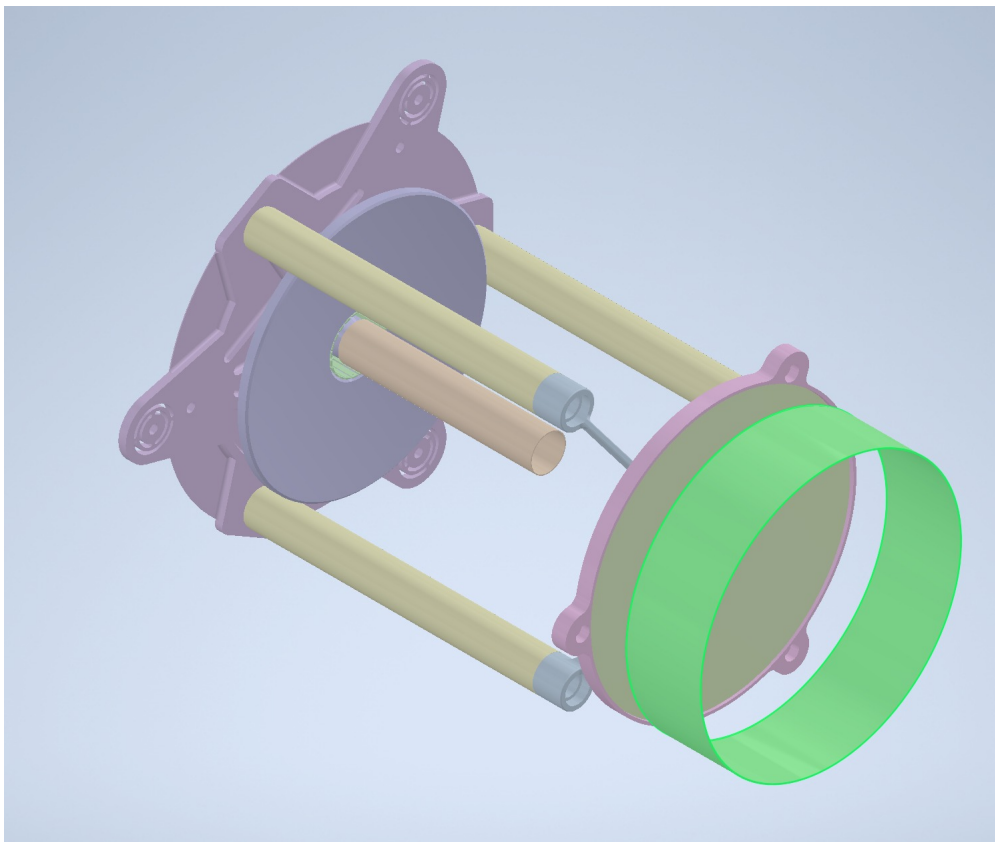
CAD layout of Spock Ø250 Telescope - credits: Skyloom
